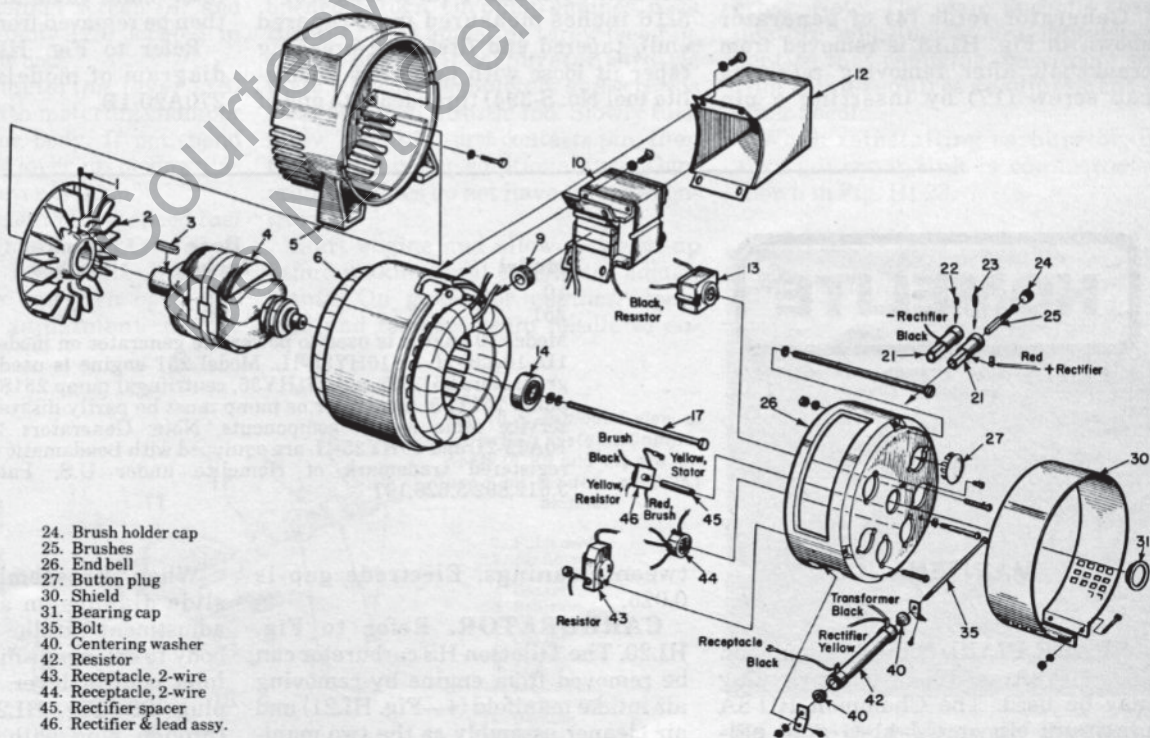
Exploded view of generator unit. Through bolt (17) retains generator rotor (4) on tapered end of engine crankshaft. After removing rotor and fan (2) assembly from engine crankshaft, fan housing end bell (5) can be unbolted from engine crankcase.
